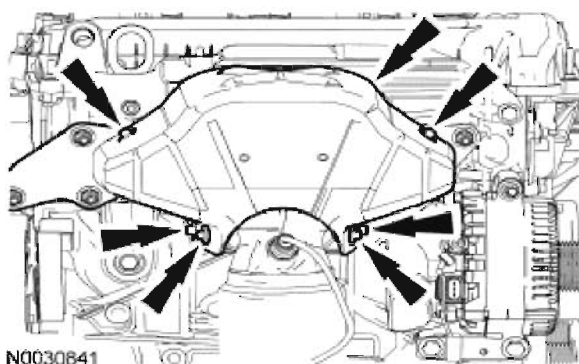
Locating Nut & Generator Electrical Connections
